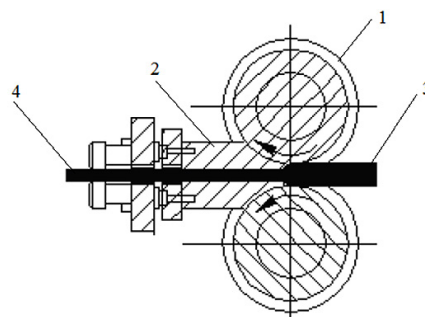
Scheme of device for Extrolling process: 1 – work rolls; 2 – matrix; 3 – billet; 4 – product [13].
